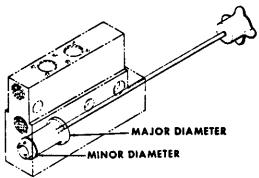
Removal of Retaining Ring, Part No. 42574. Using Accumulator Fixture, T42550-6A
